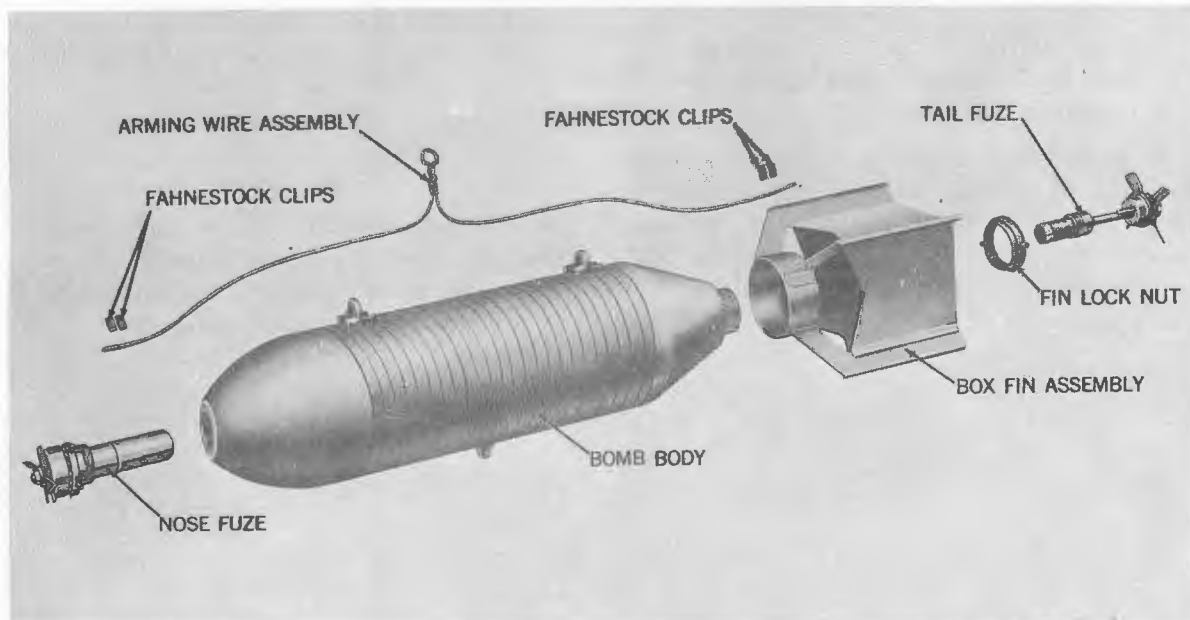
220-lb Frag Bomb AN-M88 with Fin Assembly AN-M103A1, Exploded View.
